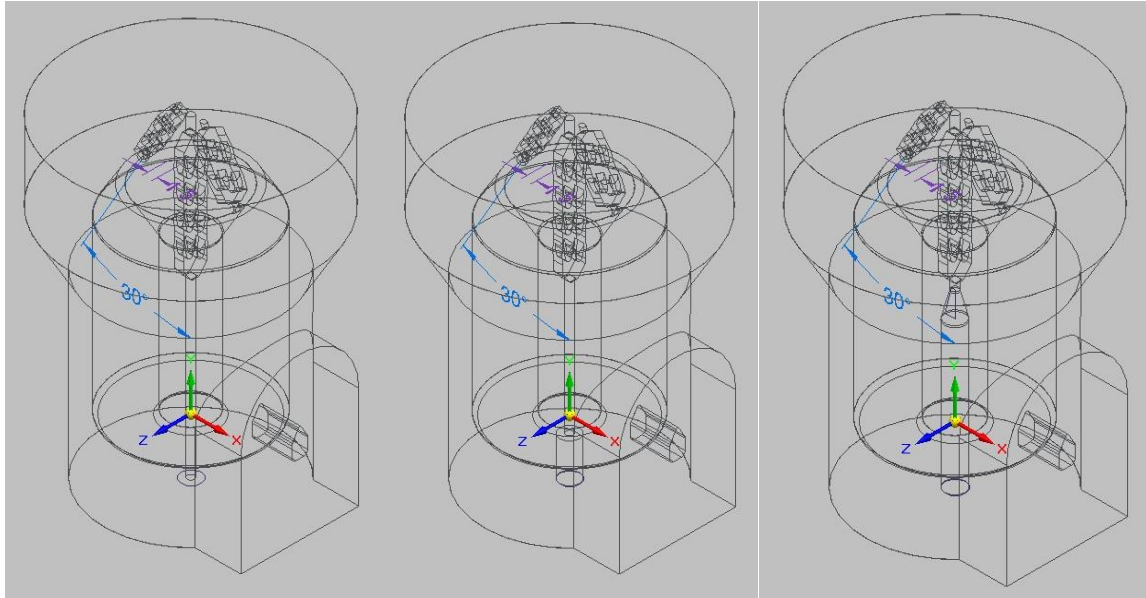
CAD designs of the duck foot geometry inserted into a liquid injector; Original design (left), wide entrance (center), and wide center post (right).
